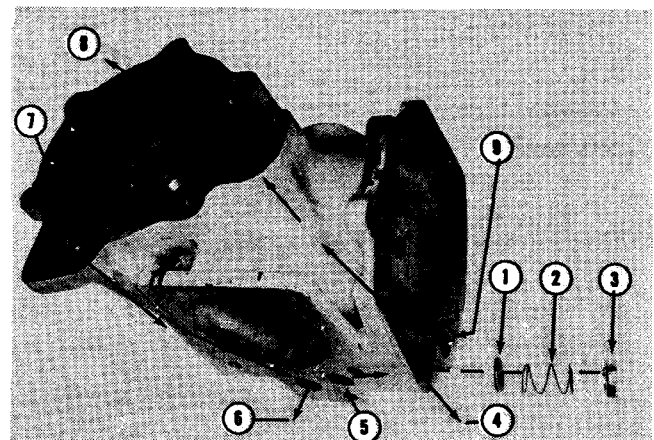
, (N10735). Anti-drain back valve and support assembly with flow diagram
